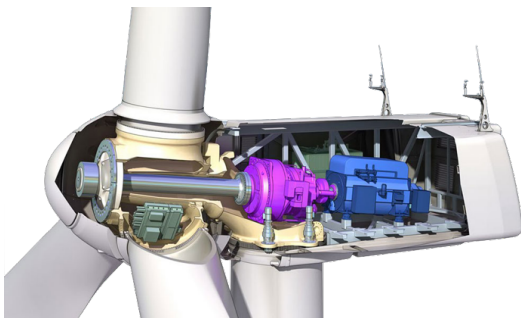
Gearbox Drivetrain (Wenzel, 2014)
